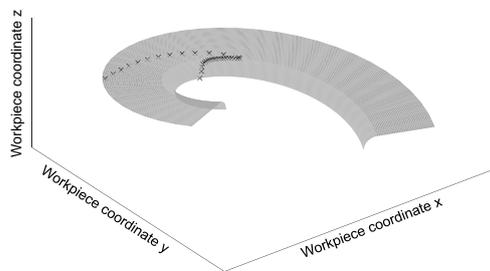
Contact points between cutting tool and workpiece on a straight sided flank and adjacent fillet for conventional whirling.
